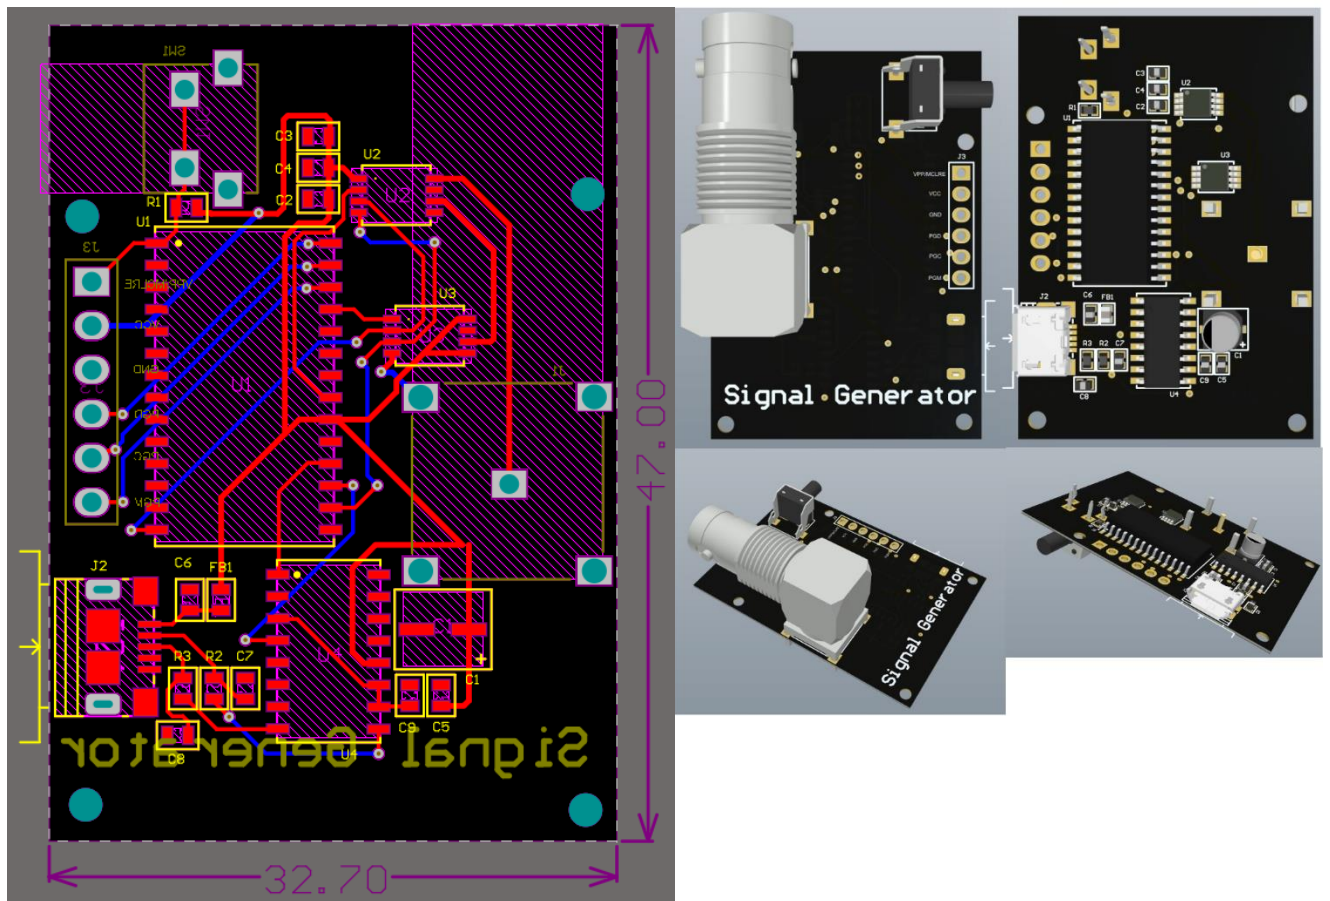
Final PCB of the system. The left image shows the PCB routing (hidden polygon pour connecting the ground pins), as well as the dimensions of the PCB (mm). The right images are a 3D view of the PCB, showing the connectors, reset button and circuitry.
